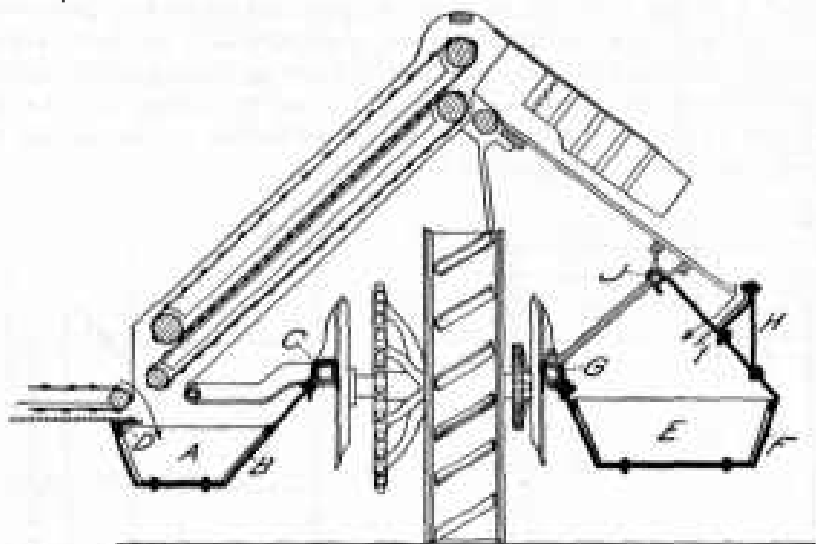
Rear view of a grain binder, showing a cross section of the pans and supports and the parts of the machine to which they are attached. *A*, Pan under the opening between the platform and lower elevator; *B*, support of the pan; *C*, stirrup which fits over the inside sill and to which the support is bolted; *D*, angle iron under the end of the platform and over which one end of the support is hooked; *E*, cross section of pan under the binder deck; *F*, support of the pan; *G*, stirrup which hooks over the outside sill and to which the support is bolted; *H*, angle iron which supports the guard at the end of the deck; *I*, guard which directs the seed that falls on the binder deck into the pan below; *J*, binder pipe over which one end of the support is hooked.
